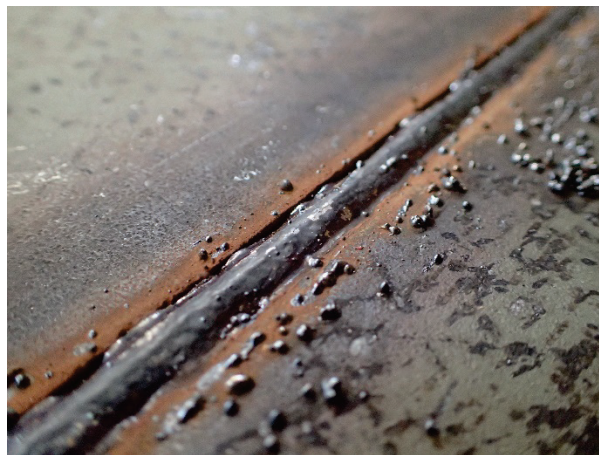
Specimens of under fill on the front bead at 20 mm.
